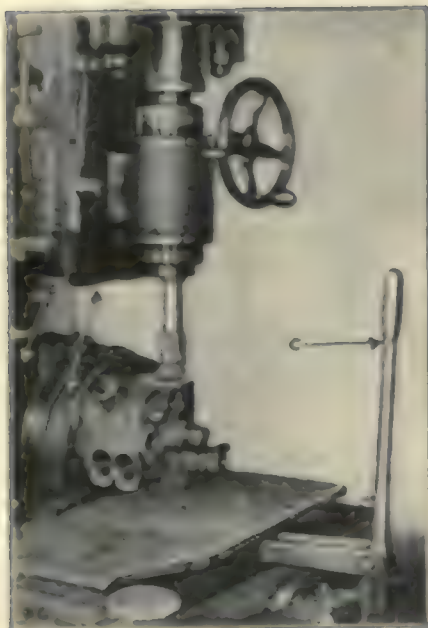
FINISH REAMING AIR MOTOR CYLINDERS. FIG. 37—SHOWING OPERATION OF REAMING FIXTURE
